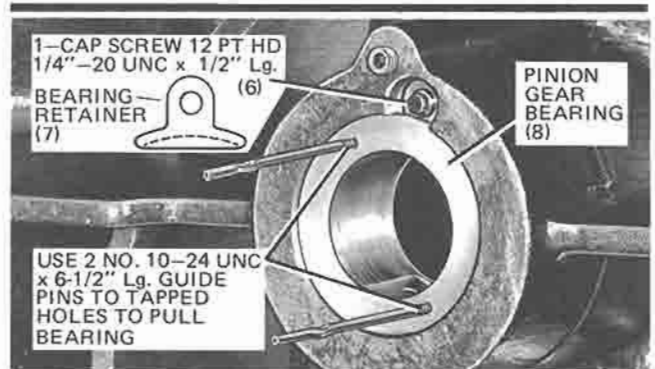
REMOVING FRONT HIGH SPEED BEARING
